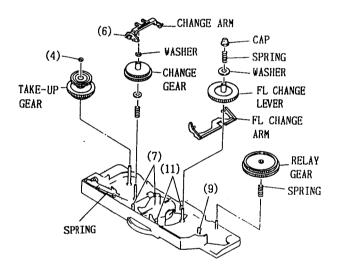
Take-up Gear, Change Arm, Change Gear, Relay Gear, FL Change Gear and FL Change Lever
